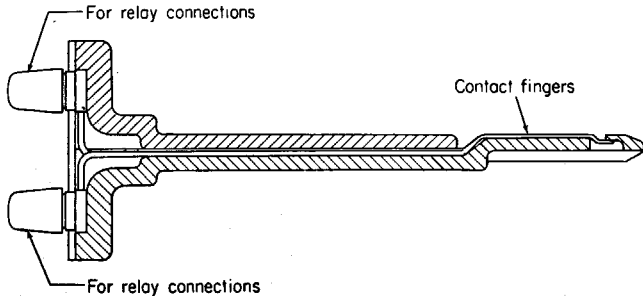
Sectional view of XLA13A test plug showing internal wiring
